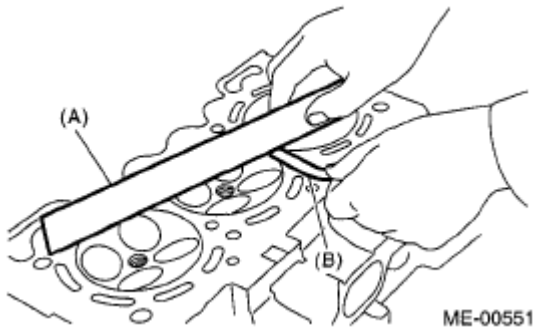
Checking For Warpage At Mating Surface Between Cylinder Block And Cylinder Head Using Straight Edge (A) And Thickness Gauge (B)
